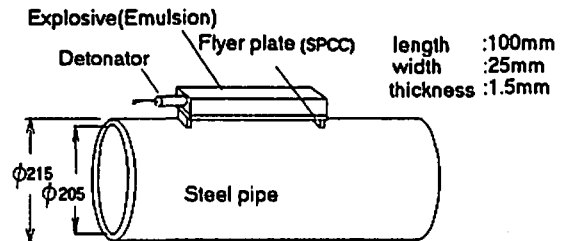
Experimental set up for explosive welding of a steel pipe
